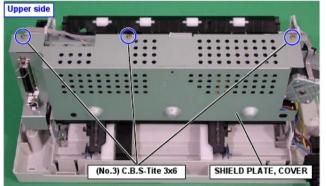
SHIELD PLATE, COVER Removal (Upper Side)
